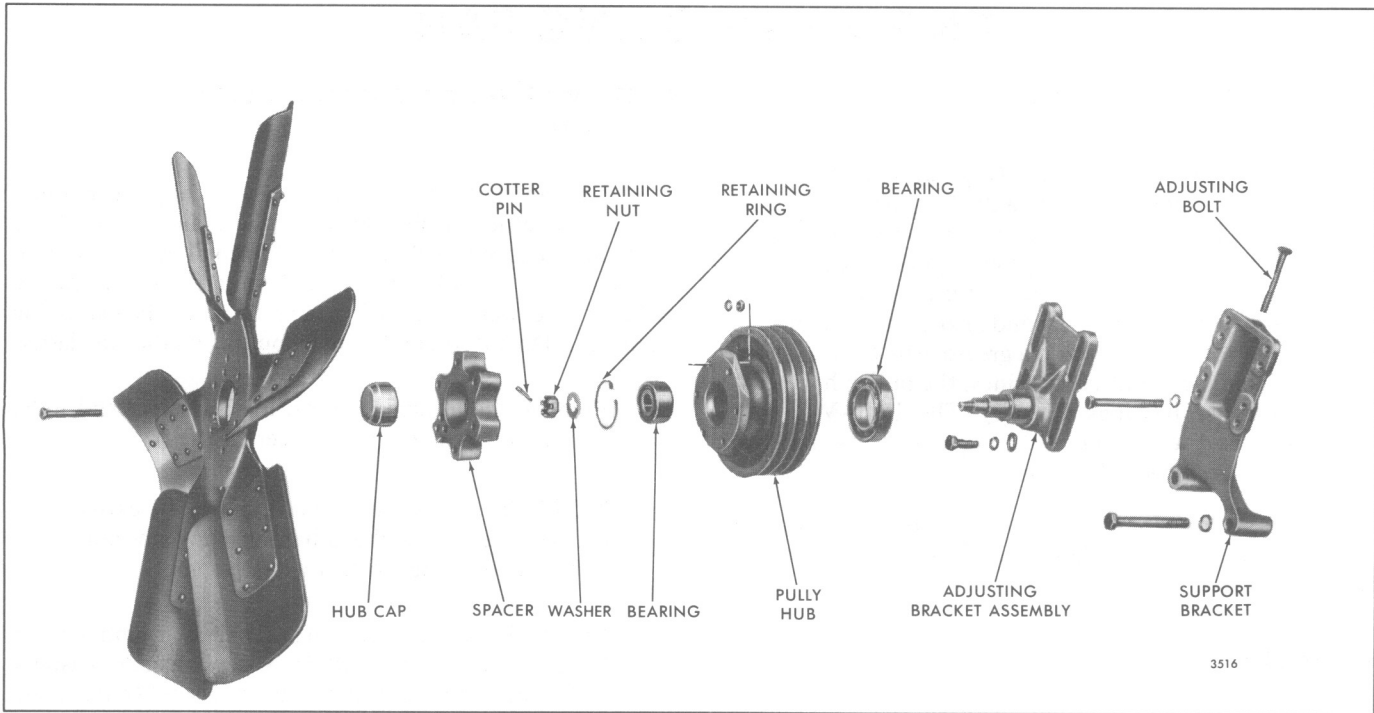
Typical Fan, Three Groove Pulley Hub and Adjusting Bracket Details and Relative Location of Parts (Former)
